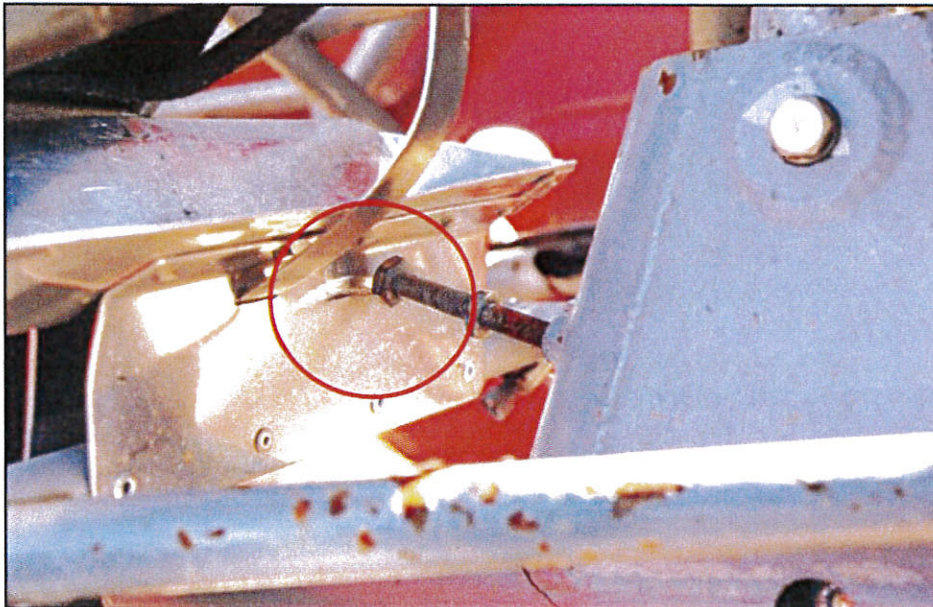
Elevator stop bolt contacting fire extinguisher bracket
